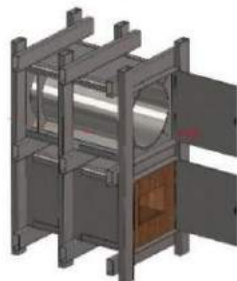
Storage pocket with rectangular frame and steel tube placed inside
